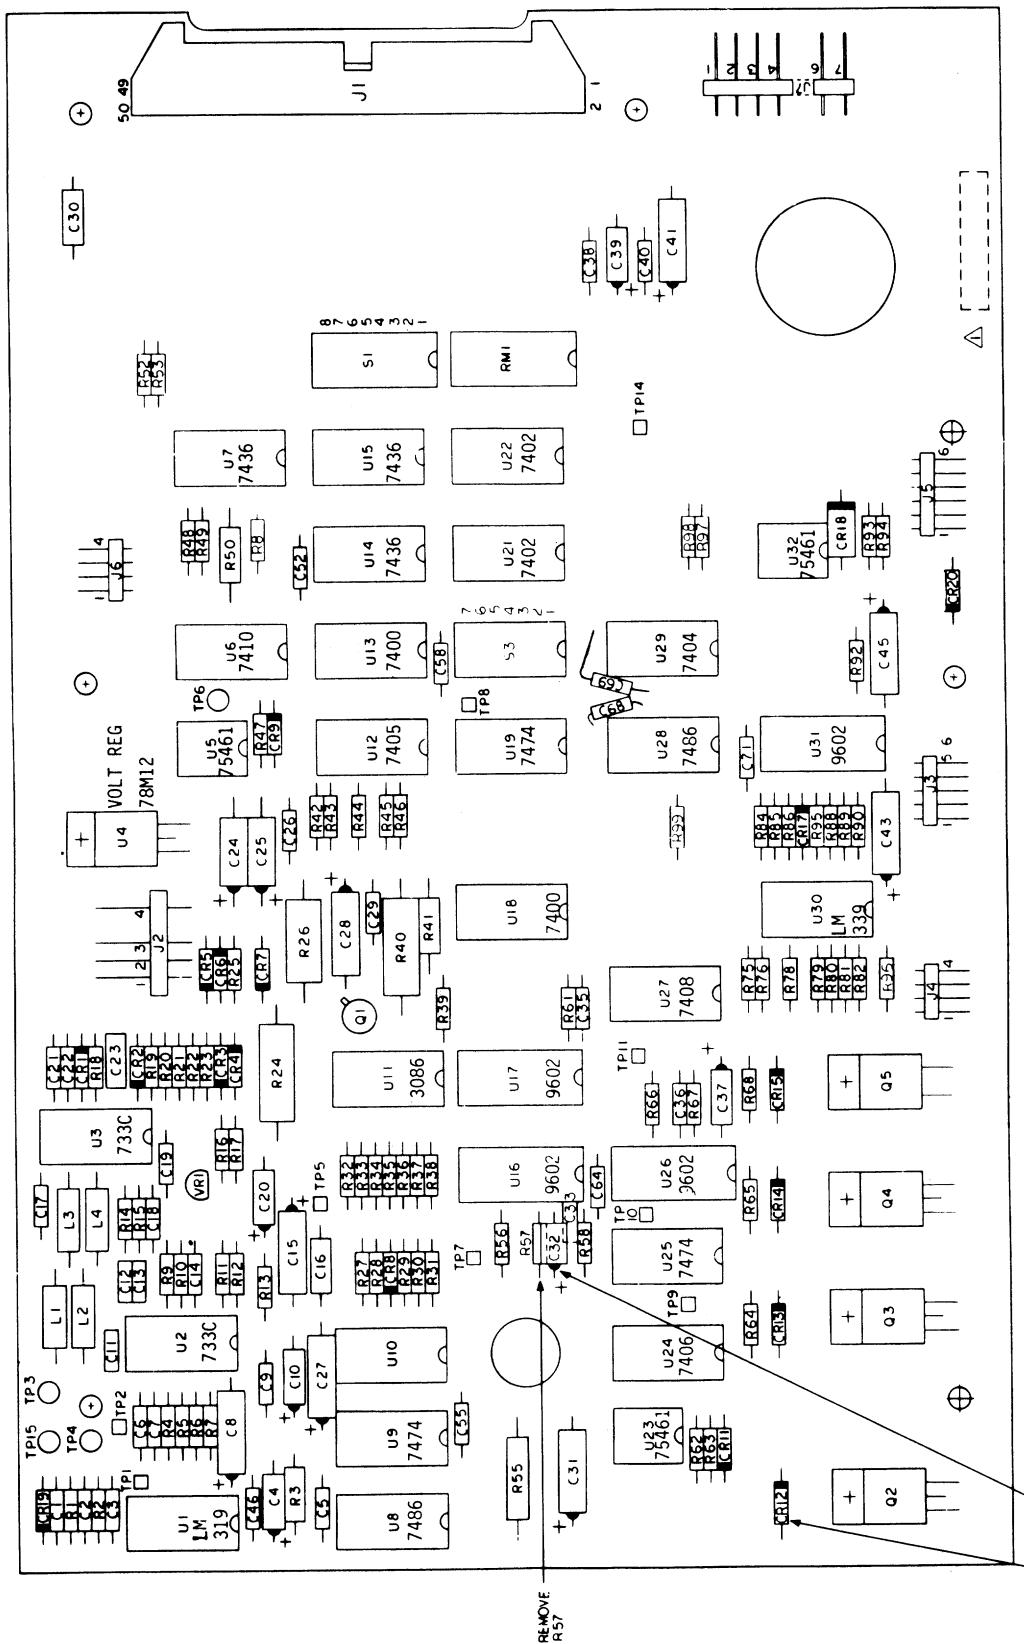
A. ASSEMBLY (SHEET 2 OF 3)
